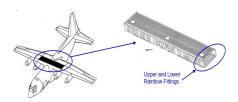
C-130 Center Wing Box and Rainbow Fitting
